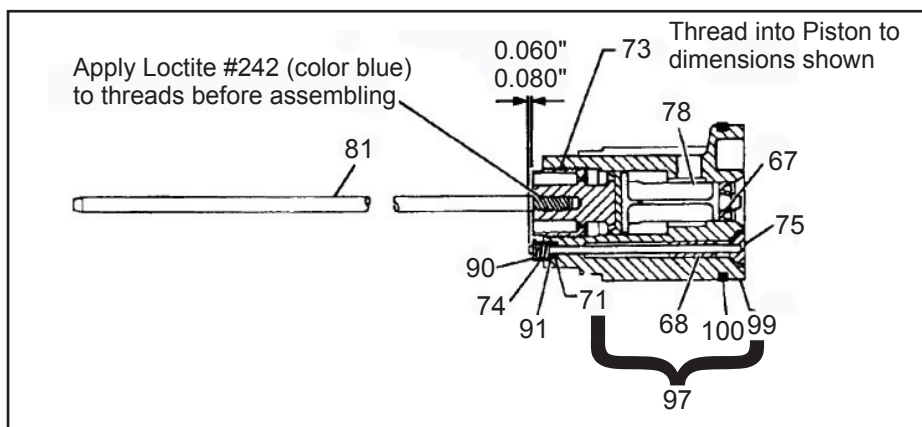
Parts Illustration for Model HW93731 -Pump Piston Assembly
